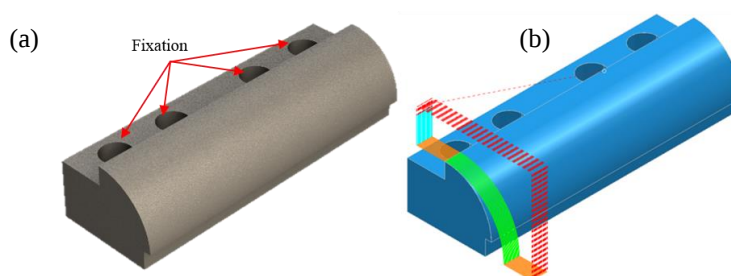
Workpiece geometry (a) and simulation of tool path (b).
